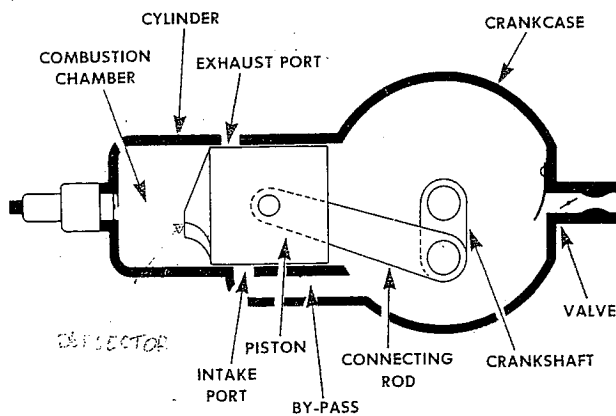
Basic parts of a two-stroke engine. (Tecumseh Products Co.)
